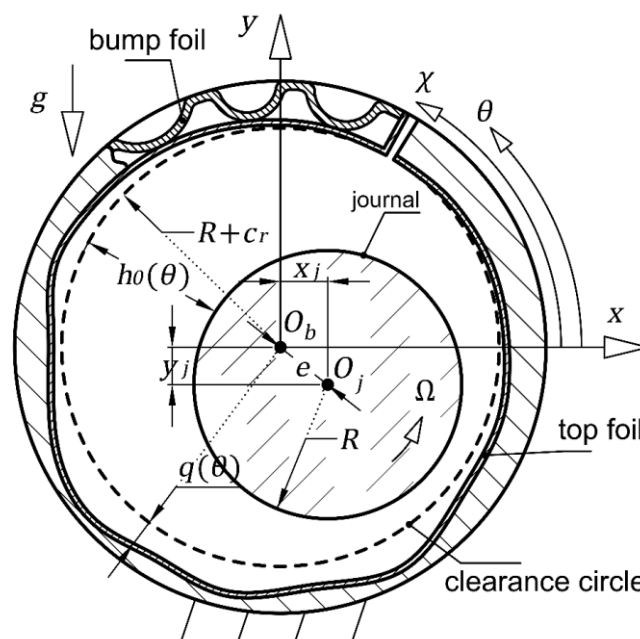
Representation of a gas foil bearing cross section, key geometry and operating parameters
